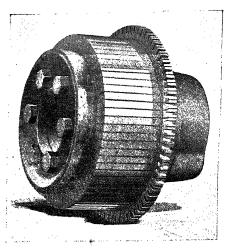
Completed Commutator for Small Machine Courtesy of Reliance Electric and Engineering Company
